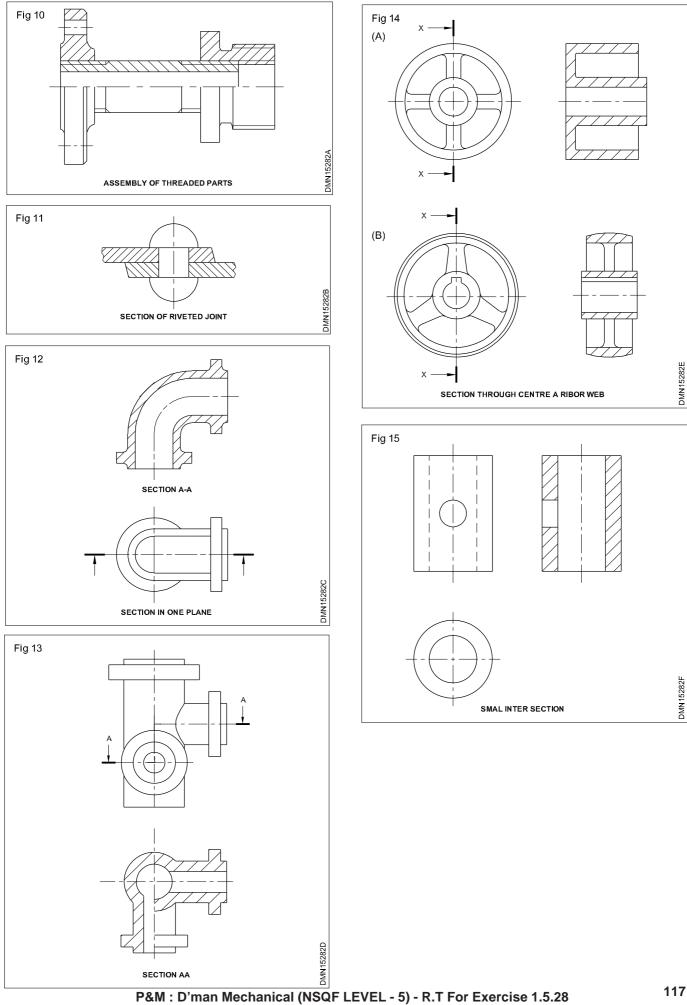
to 16 shows different sections such as section on one plane, section on two parallel planes and etc. The methods shown in these features to be applied wherever applicable.
